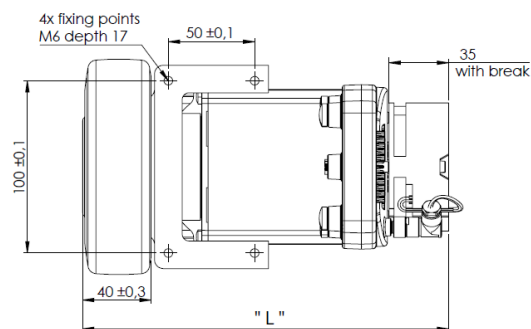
Overall dimensions – ‘SWD® 125 2-stages and external brake’
